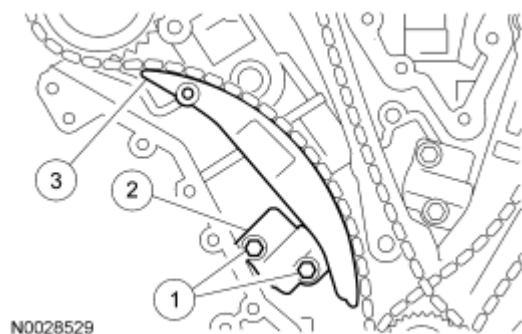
Identifying RH Timing Chain Tensioner Arm & Bolts
